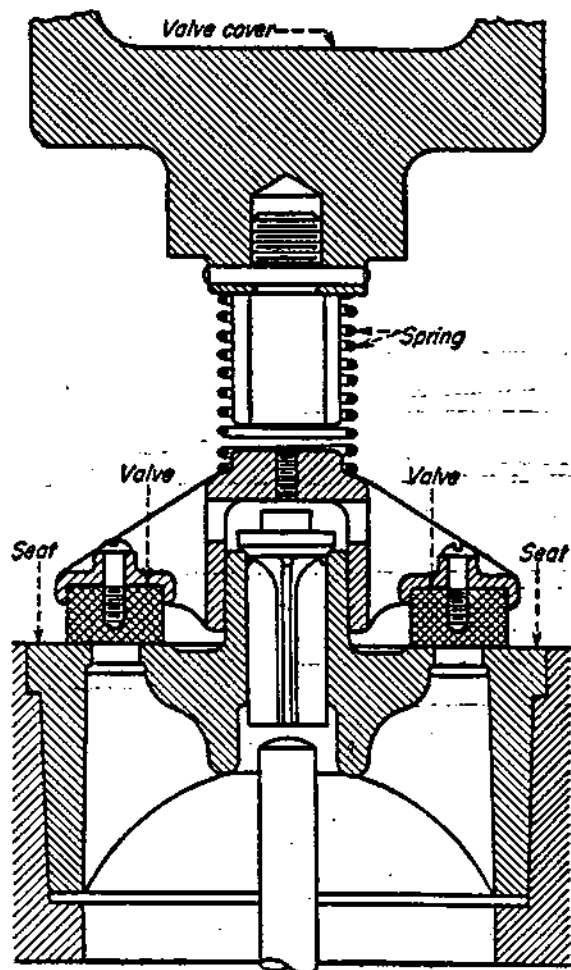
A double-ported valve with a separate bevel-faced valve in the center of seat permitting the use of synchronized suction-valve unloading control.
